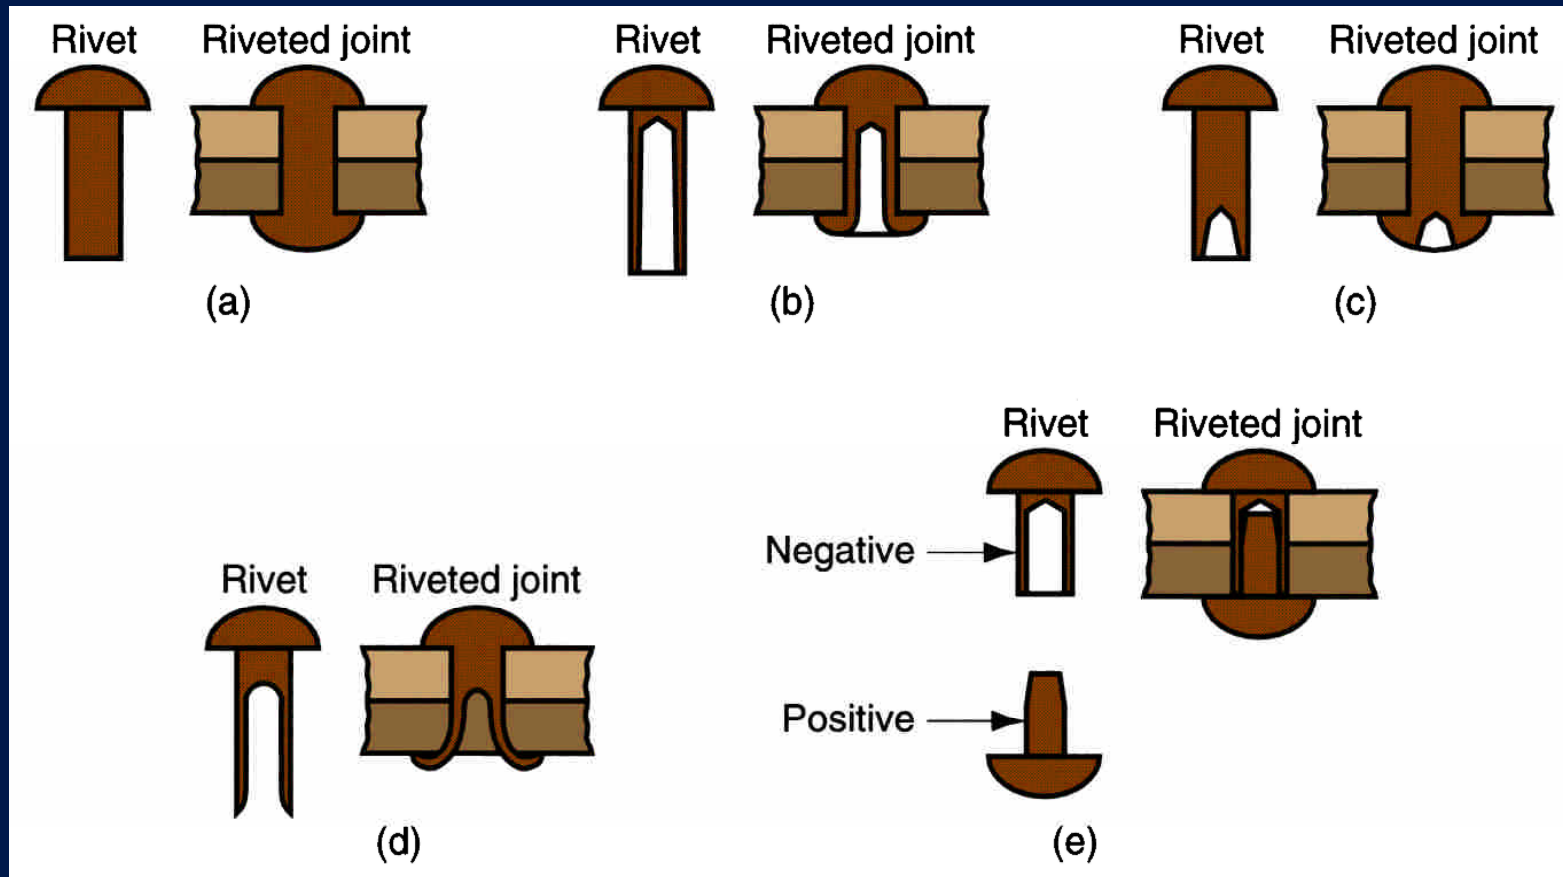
Five basic rivet types, also shown in assembled configuration: (a) solid, (b) tubular, (c) semitubular, (d) bifurcated, and (e) compression
